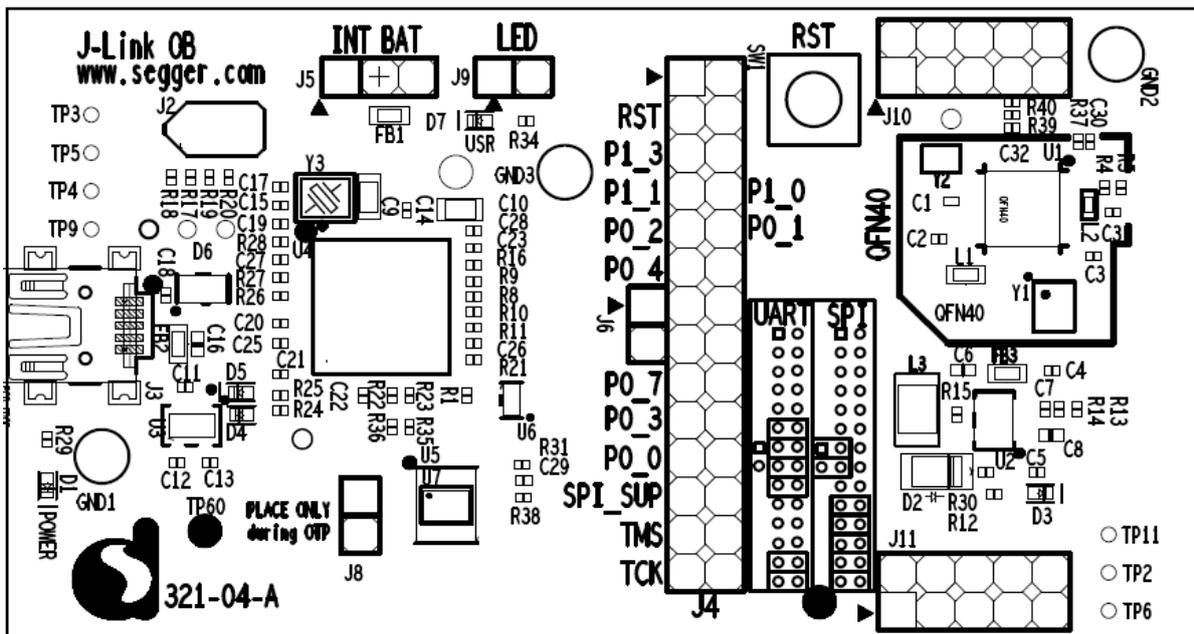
Components on PCB top layer of the DA14585/6 Basic kit (321-04-A)
